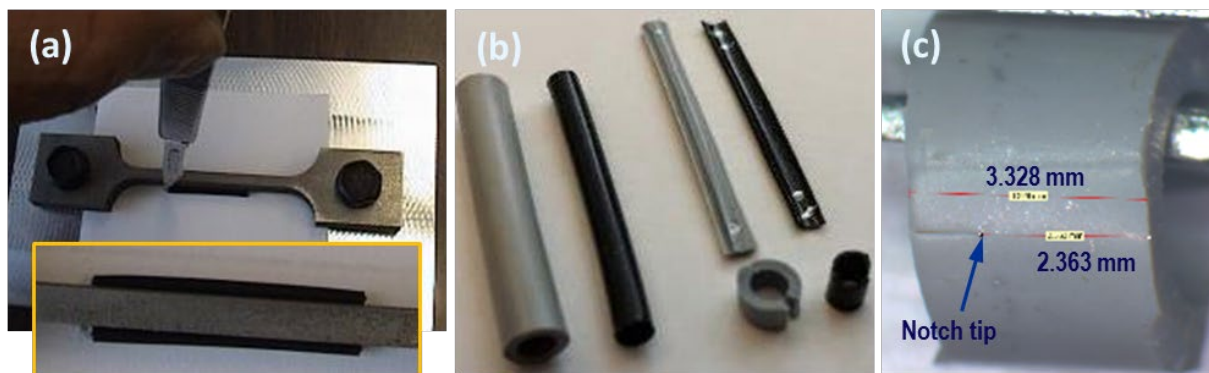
Preparations of test specimens for shrink tubing candidates, (a) sectioning fixture, (b) axial and radial sections from the tubing, and (c) dimensions measured by optical microscope.
